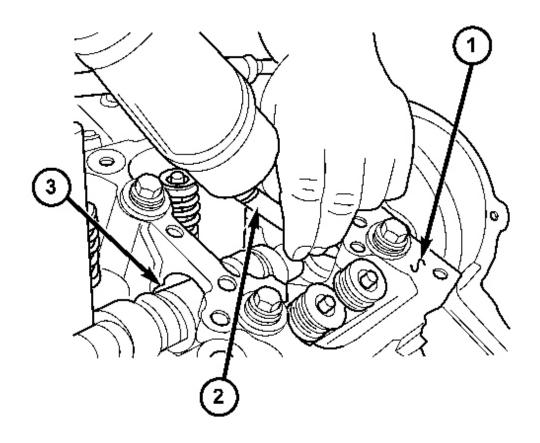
Camshaft Thrust Plate, Bolt & O-Ring Courtesy of CHRYSLER LLC
